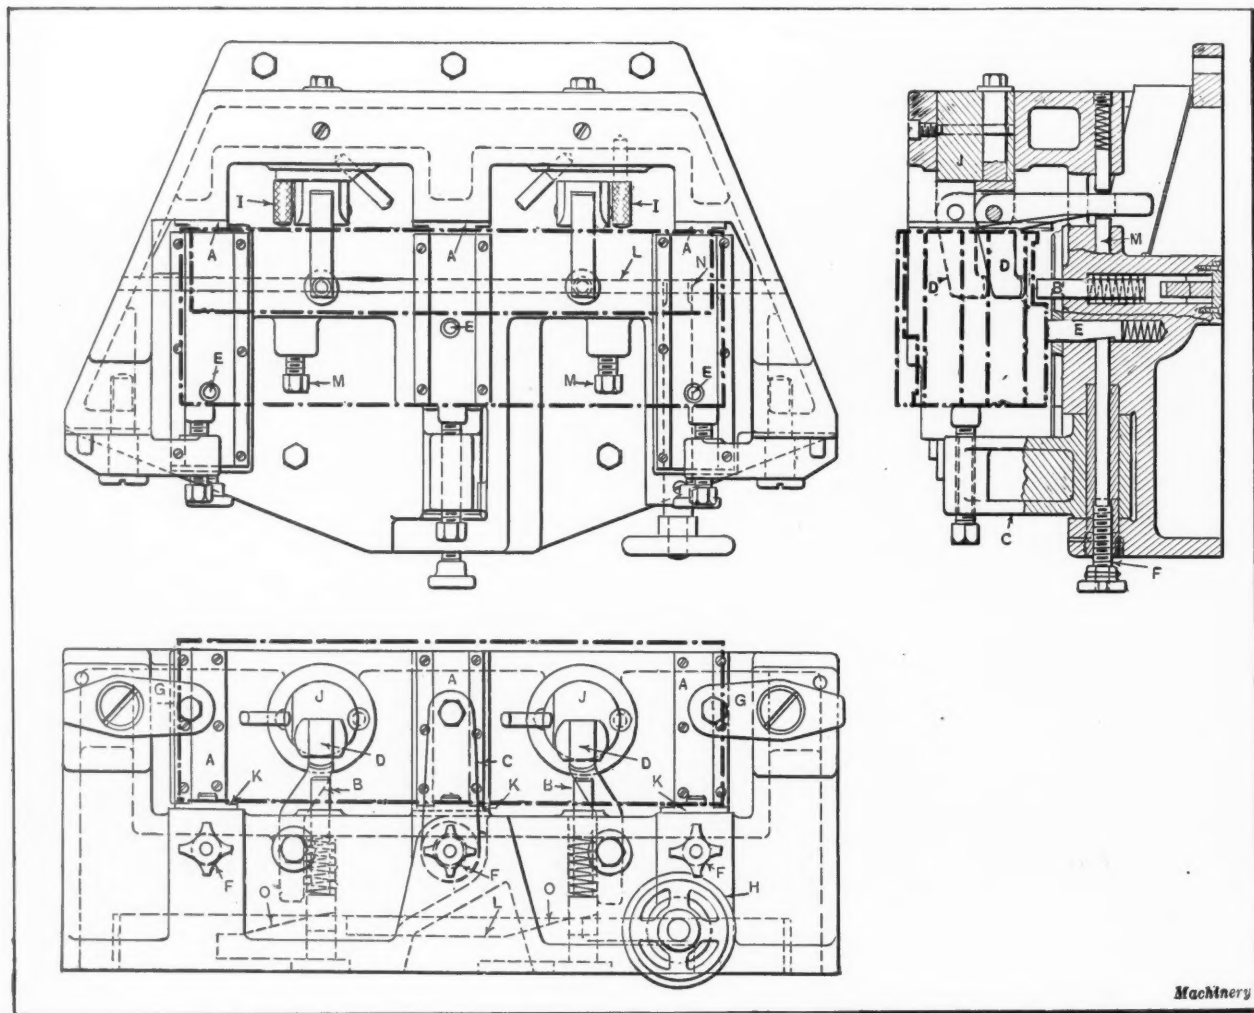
Construction Details of the Milling Fixture shown in Fig. 4
